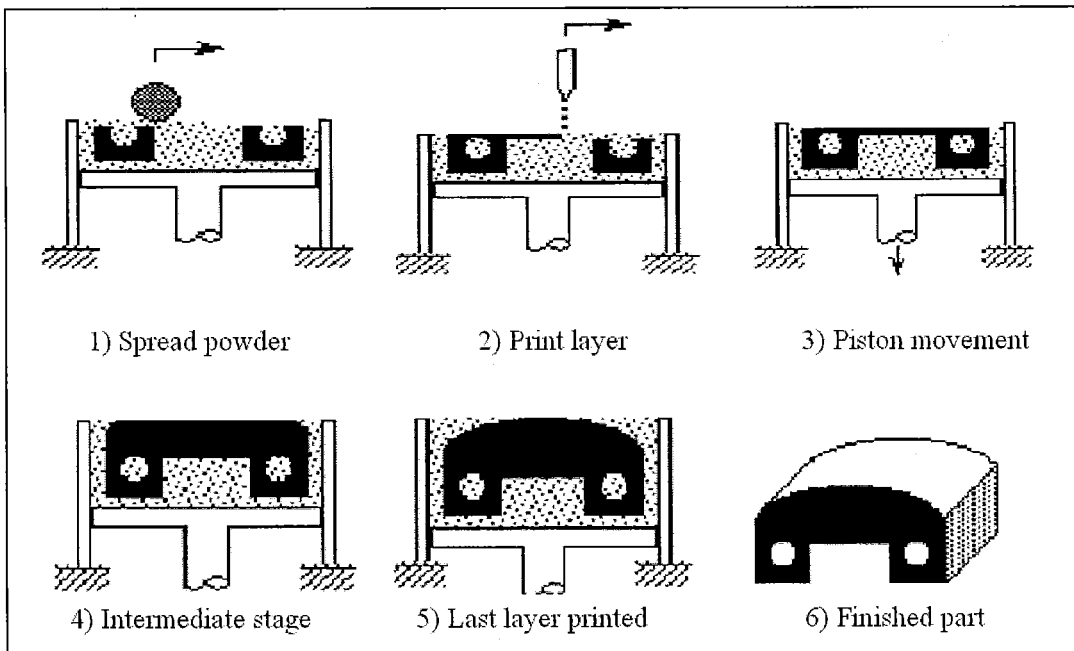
Schematic Illustration of Three Dimensional Printing Process
